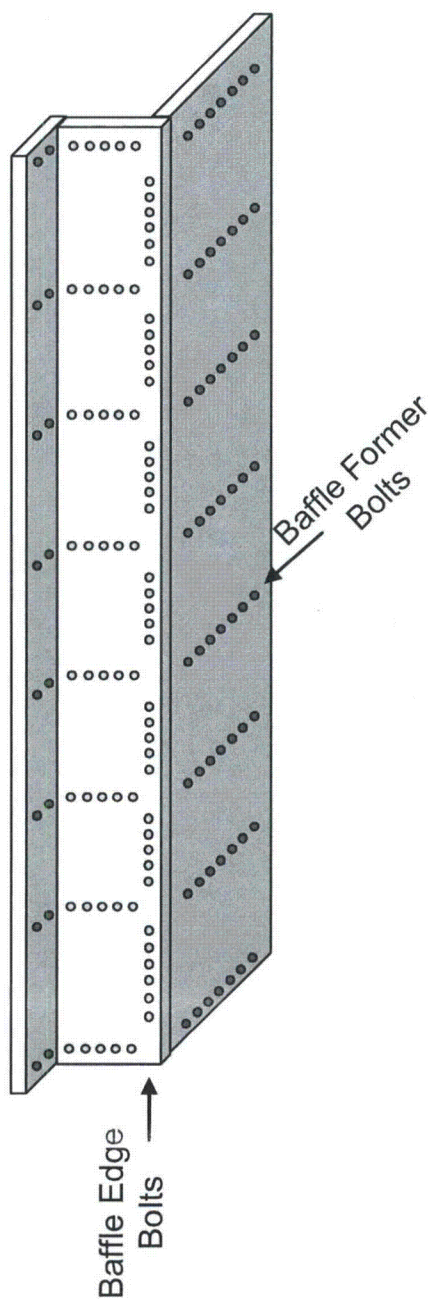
Bolting Systems used in Typical Westinghouse Core Baffles
